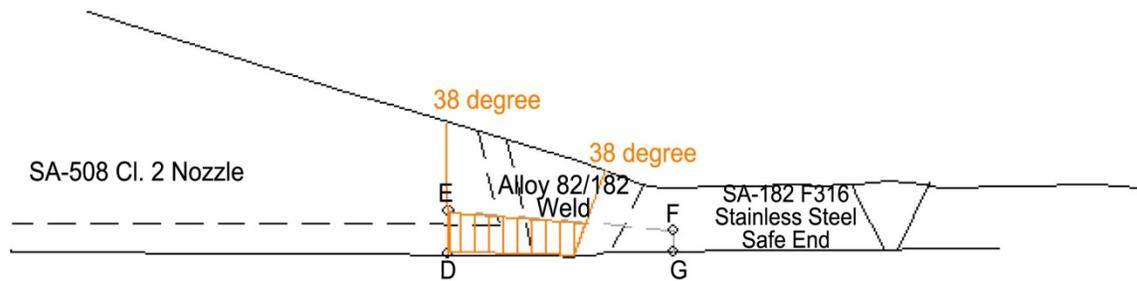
Pressurizer Spray Nozzle Weld Circumferential Scan CRV Coverage Assessment
